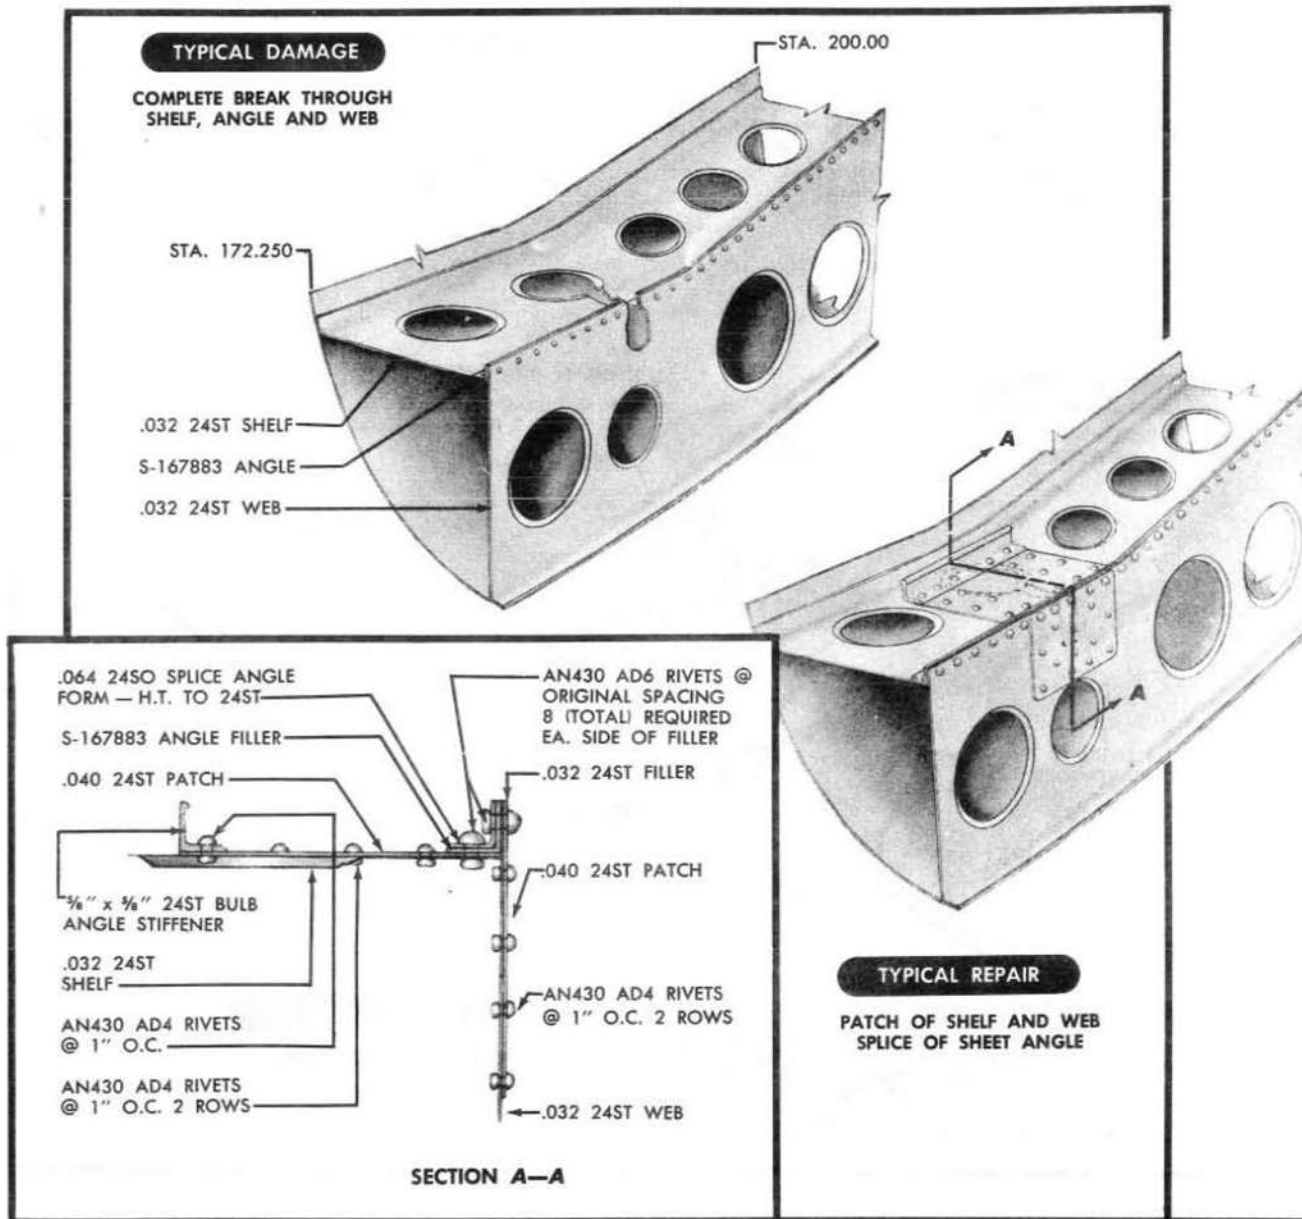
Patch and Splice Repair to Nacelle Fuel Tank Floor (Sheet 3 of 3)
